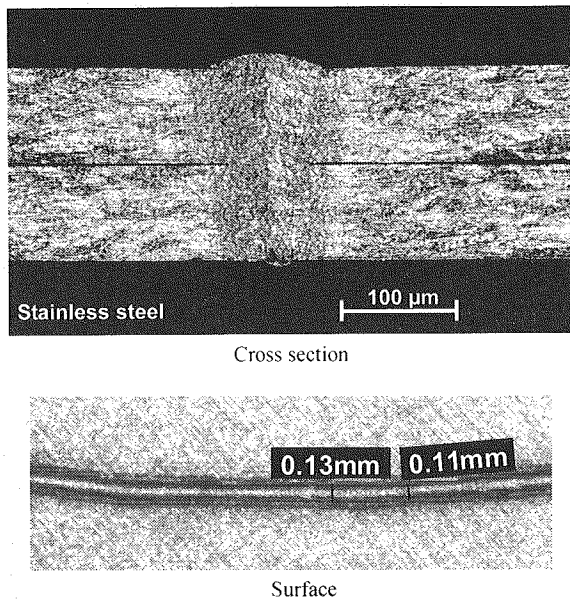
Welding of stainless steel of 0.1mm thickness
